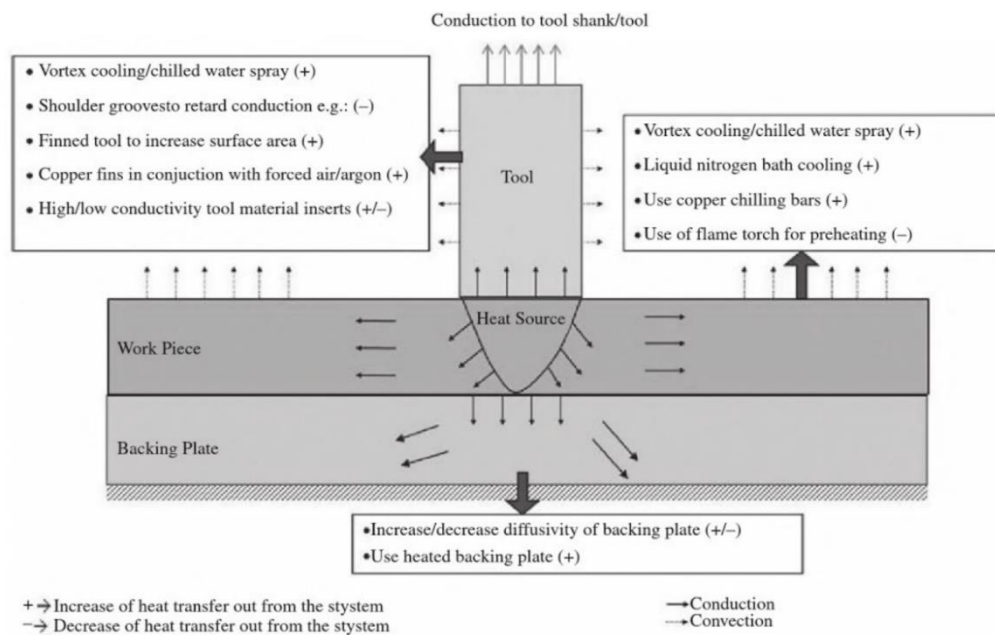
Thermal management methods that can be used in friction stir welding process. Arrows indicate heat transfer [1-27].
